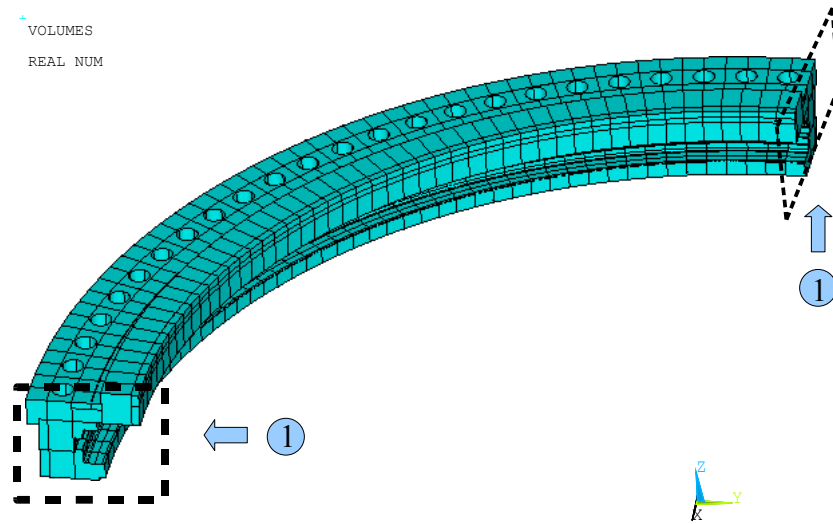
Upper part of the slewbearing - 90° SE segment
